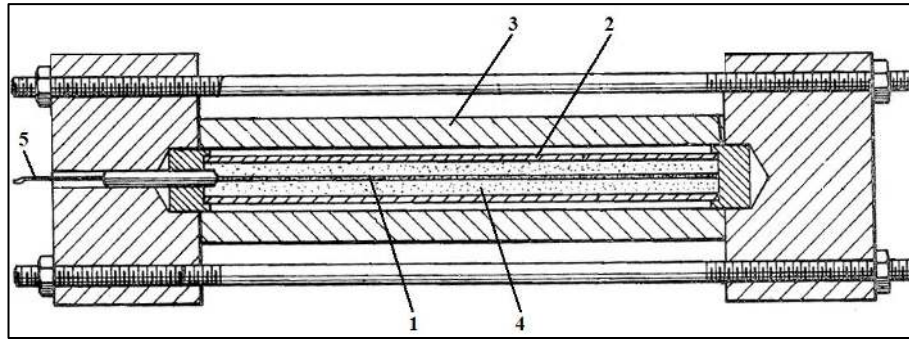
Cross sectional view of compressed elastomer autofrettage apparatus [53]
